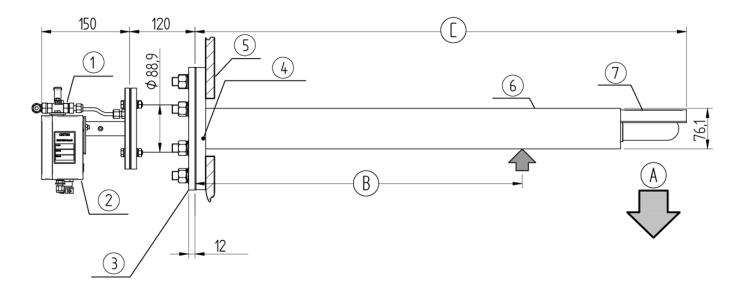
Dimensions of the ZIRKOR200, probe lengths 3 - 5 (dimensions in mm)
